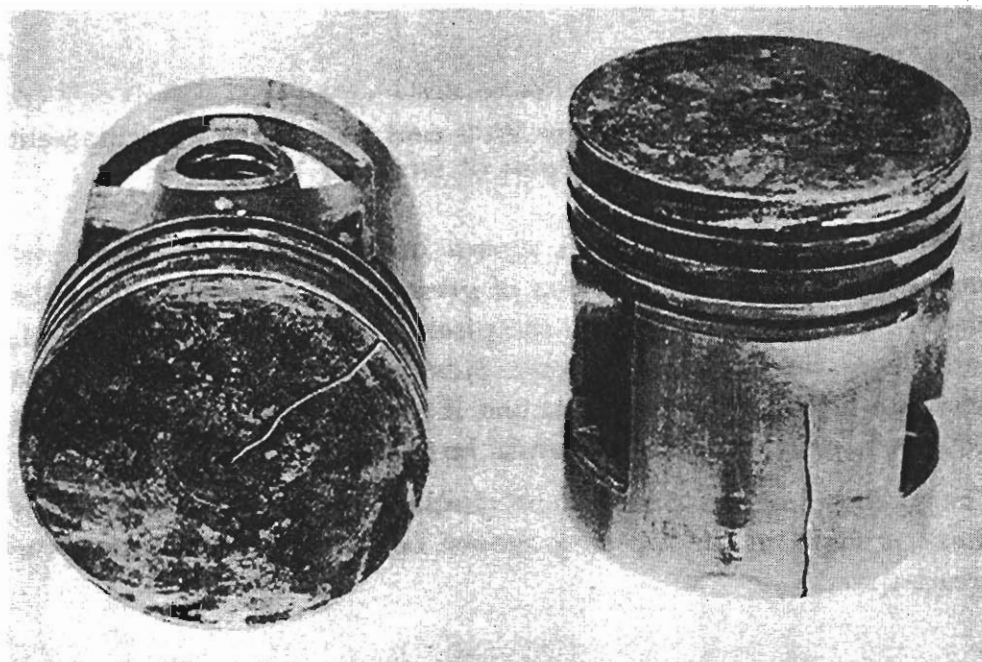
Pistons Should Be Closely Inspected After Cleaning. Note the Cracks in the Piston Head and the Skirt.
